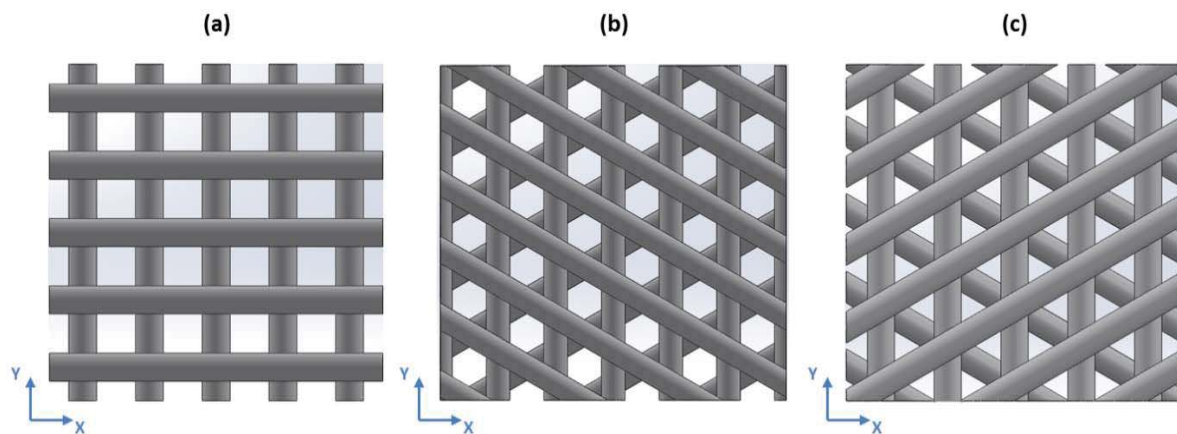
Three of most common patterns fabricated by robocasting technique; (a) square pattern; (b) honey comb pattern; (c) triangle pattern
